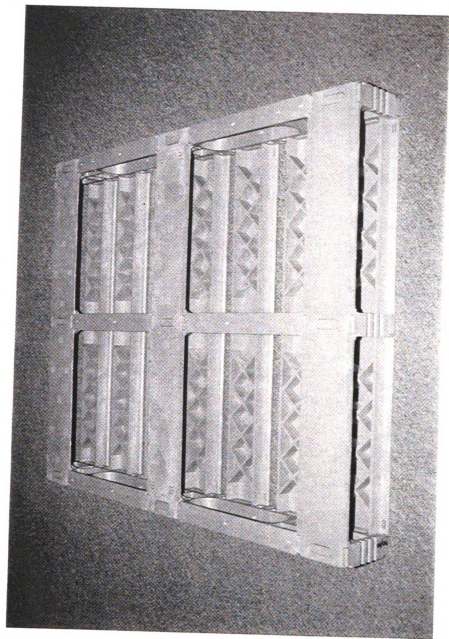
Injection Molded Plastic Pallet (Bottom View)
